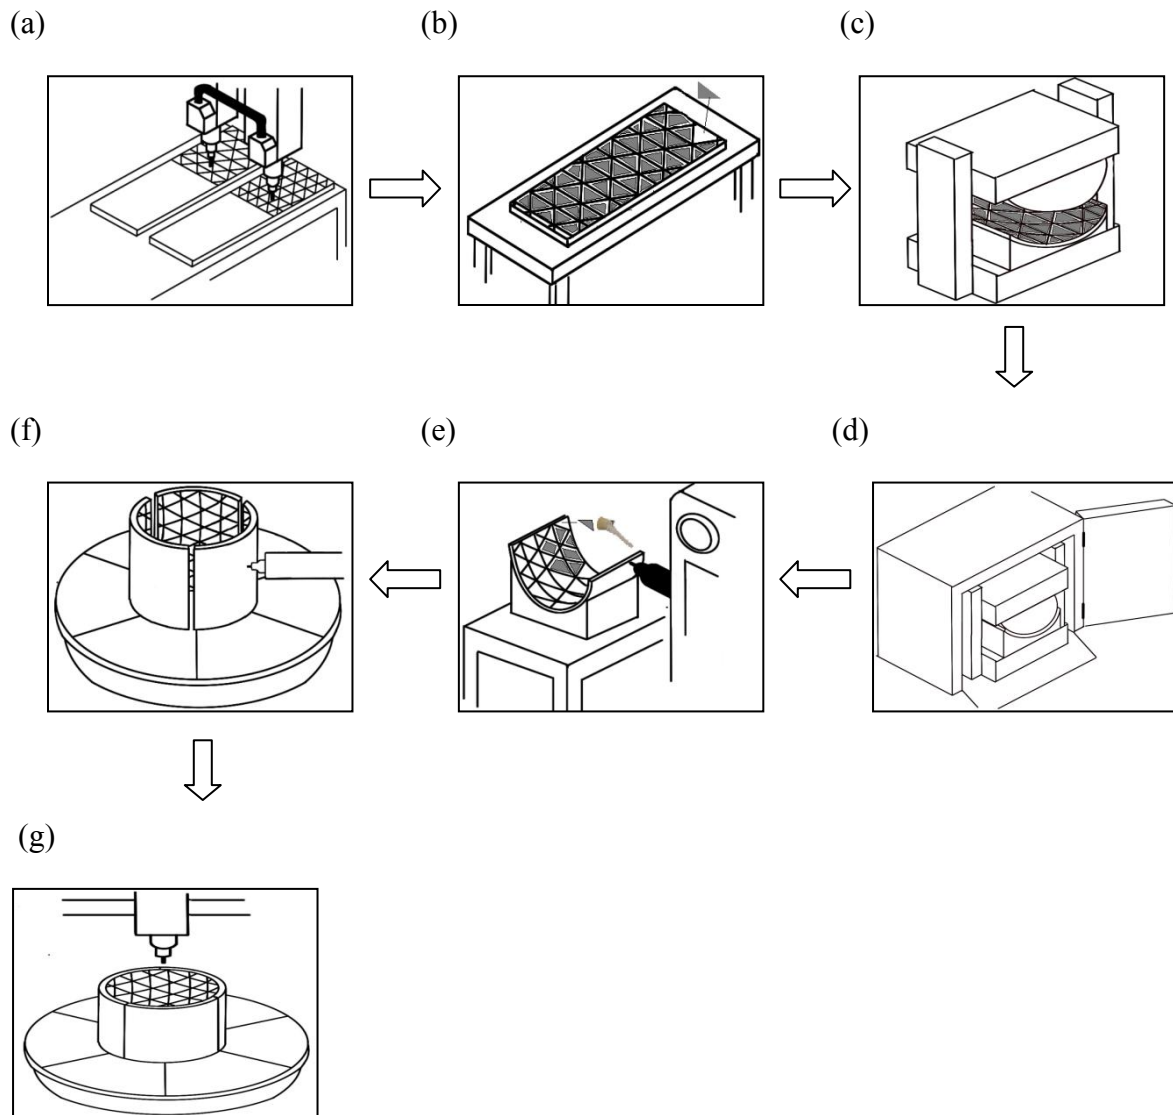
A schematic illustration of the CAF process for forming 1/3 pieces for isogrid cylindrical assembly by bending and forming.
